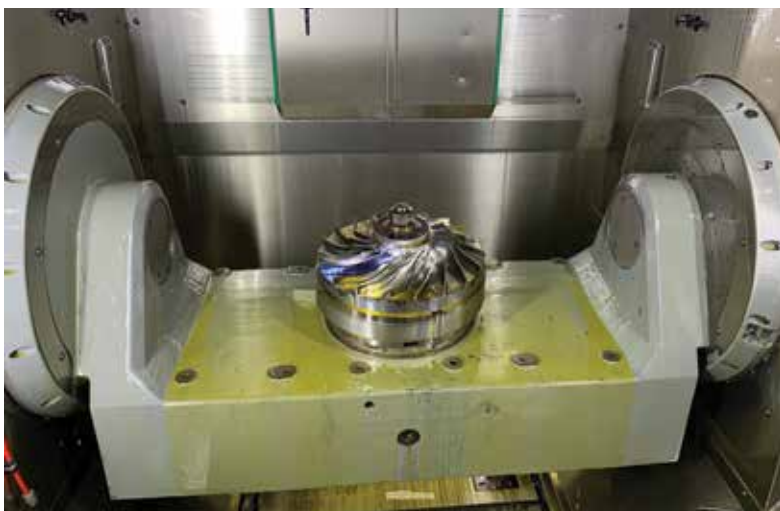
Five-axis milling is used for precision manufacturing of pumping impellers
